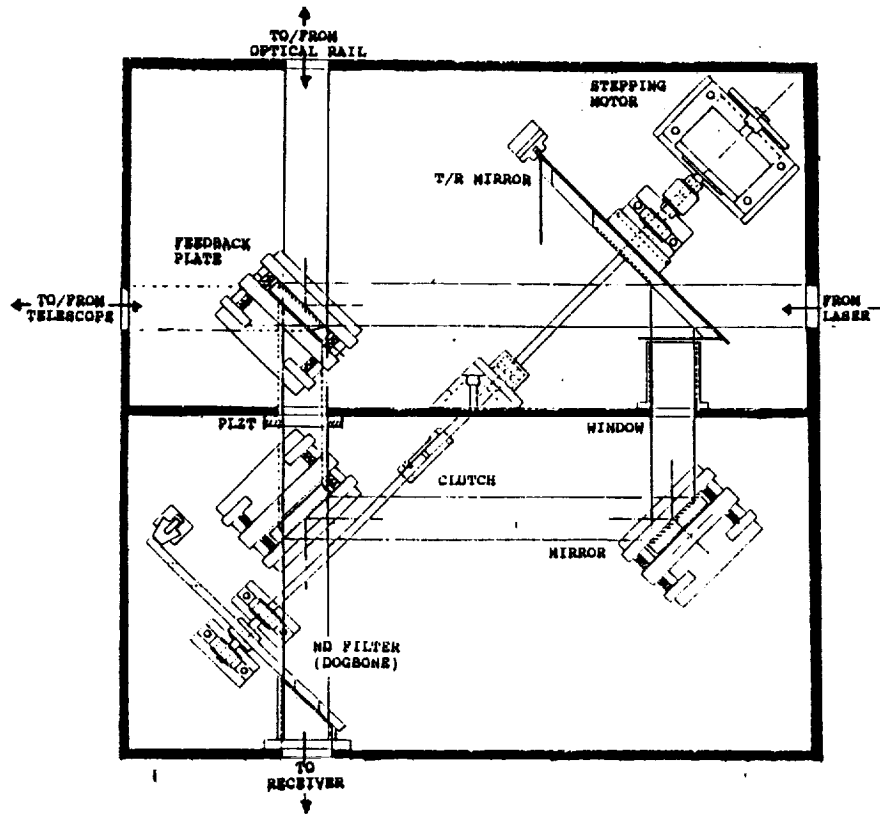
EOS Transmit/Receive assembly. (From EOS drawings.)
